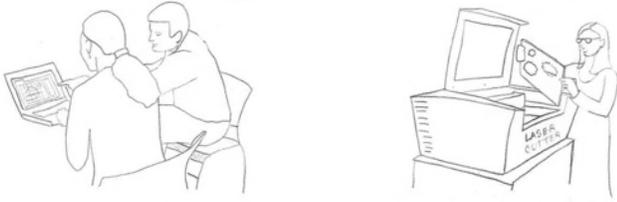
At Starter Station 3, learners used the software to design gears with custom properties (including size, number of gear teeth, position, and position of holes), then were shown how to cut their gears out using a lasercutter.
